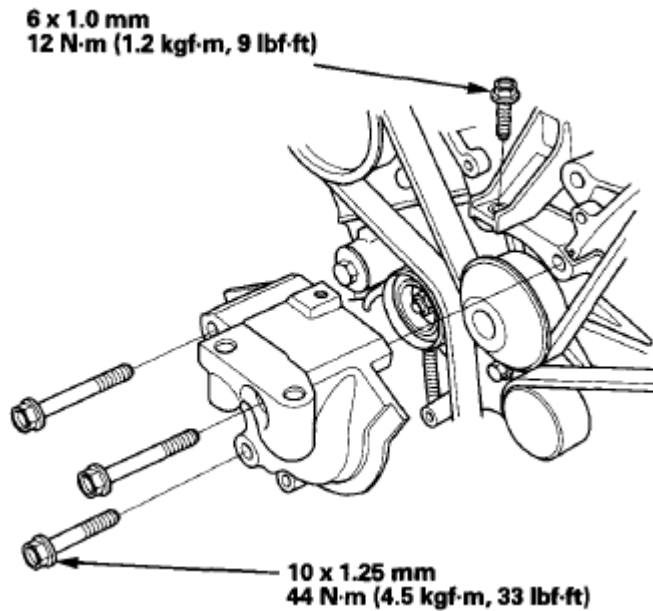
Installing Lower Half Of Side Engine Mount Bracket With Torque Specifications
